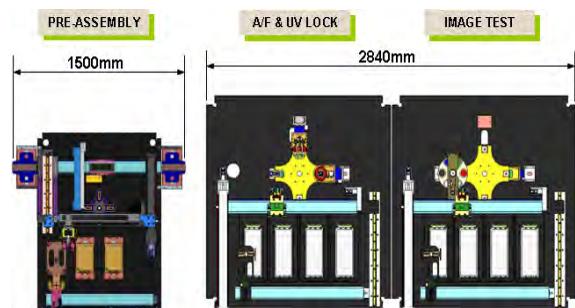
Layout & footprint of assembly and evaluation system for phone camera module
